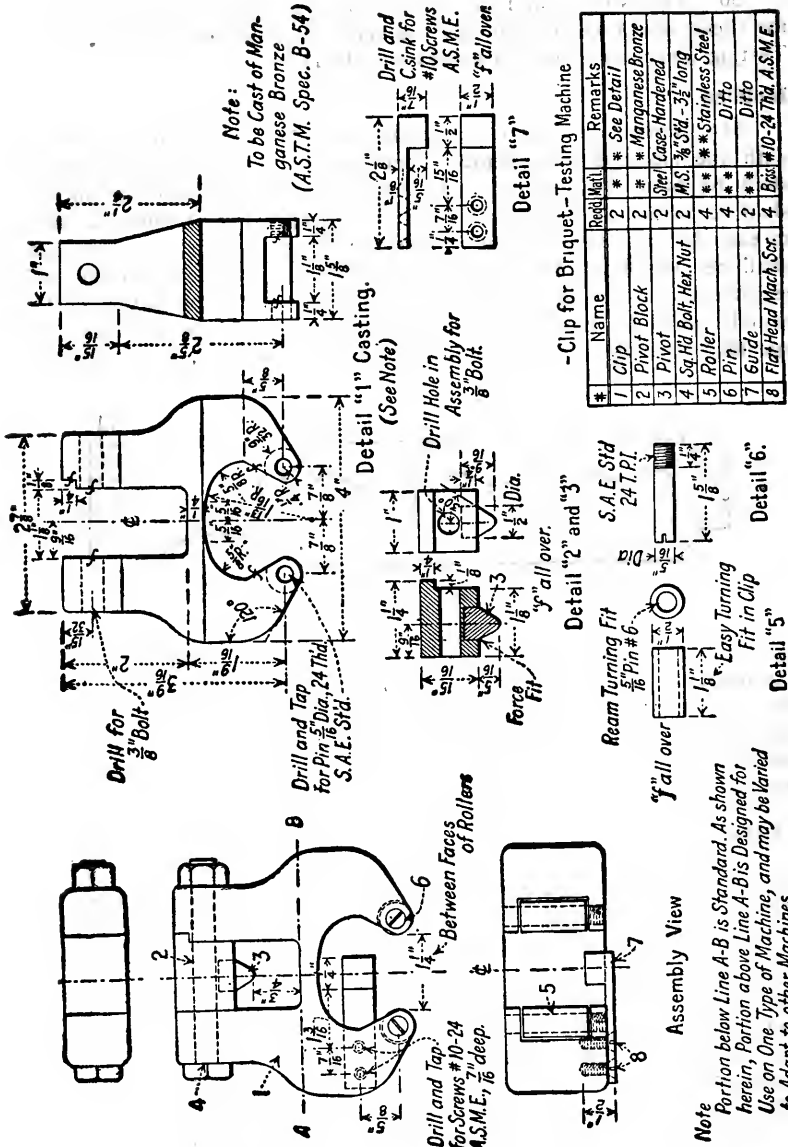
CLIP FOR BRIQUET TESTING MACHINE
